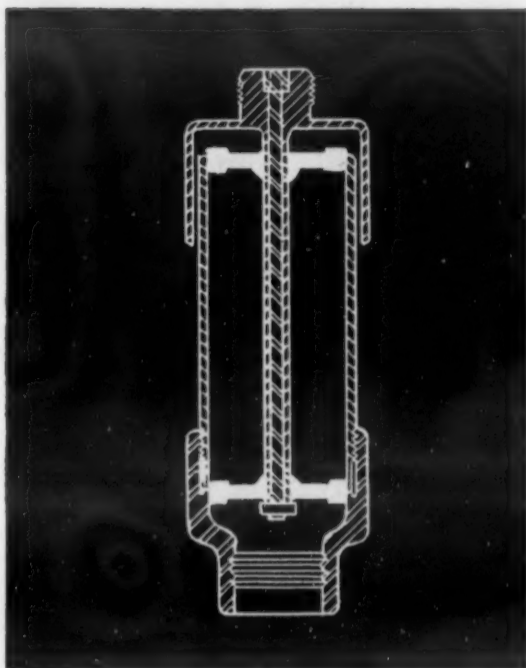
Sectional drawing of a microphone equipped with Lord shock mountings (shown in solid white). The supporting thimble, bottom and the cap at top are the die cast components.
